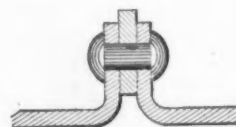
Flanged Joint for Boiler Flue Tubes.
